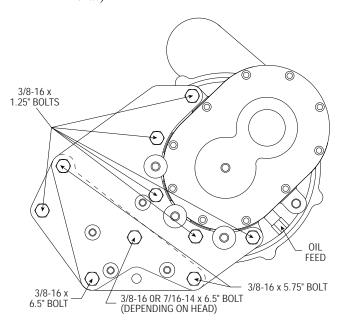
d / Driver side supercharger mount. ('69 Mustang)
